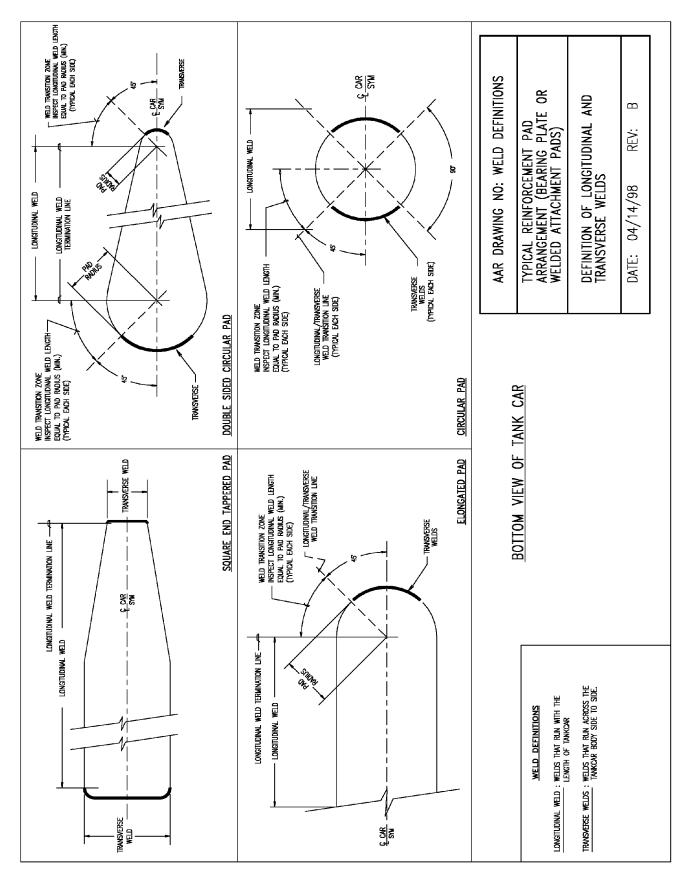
Weld Definitions for the Bottom View of the Tank Car
